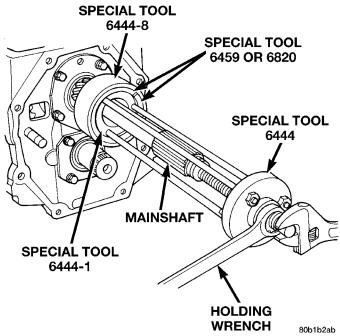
Removing Fifth Gear From Mainshaft Splines
